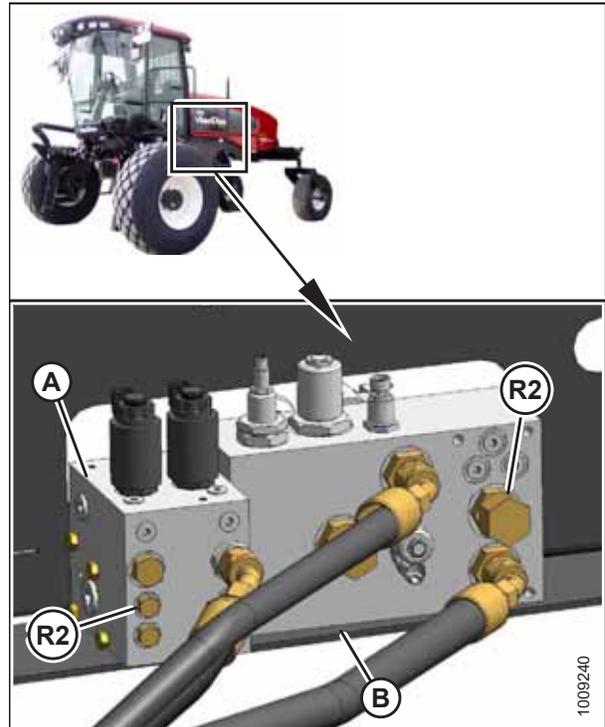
Manifolds without Reverser Manifold in Factory Configuration
